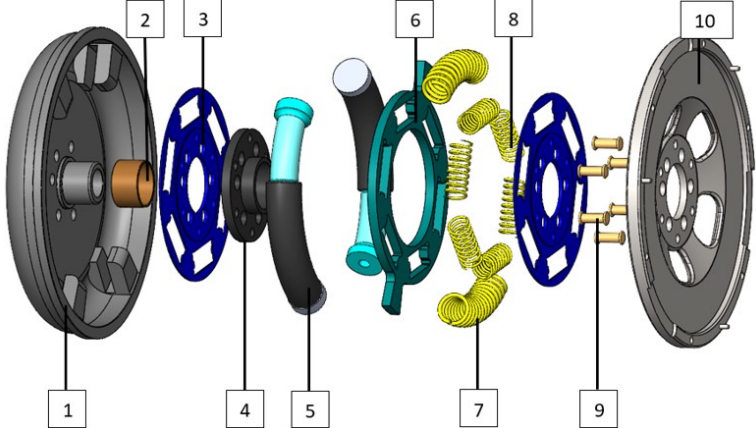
Parts of Pneumatic Dual-Mass Flywheel
